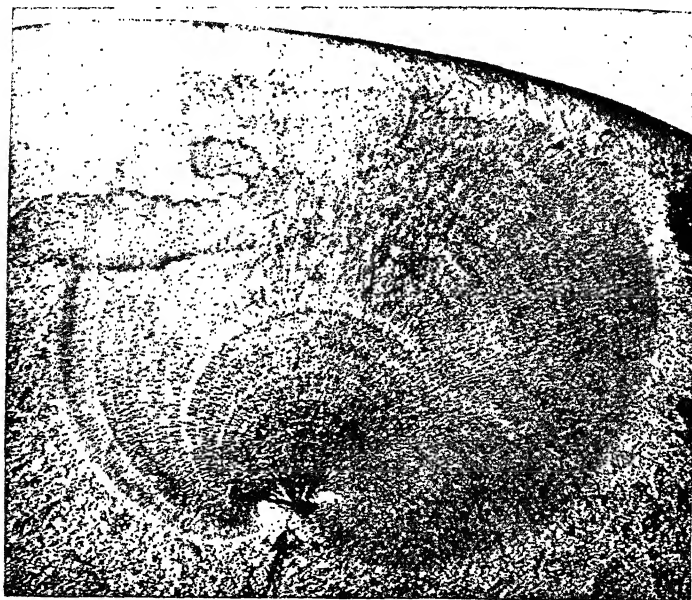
Fatigue fracture which originated in a slag inclusion (see arrow) in a sheet roll.  $\times \frac{1}{2}$ . (Oberhoffer.)
